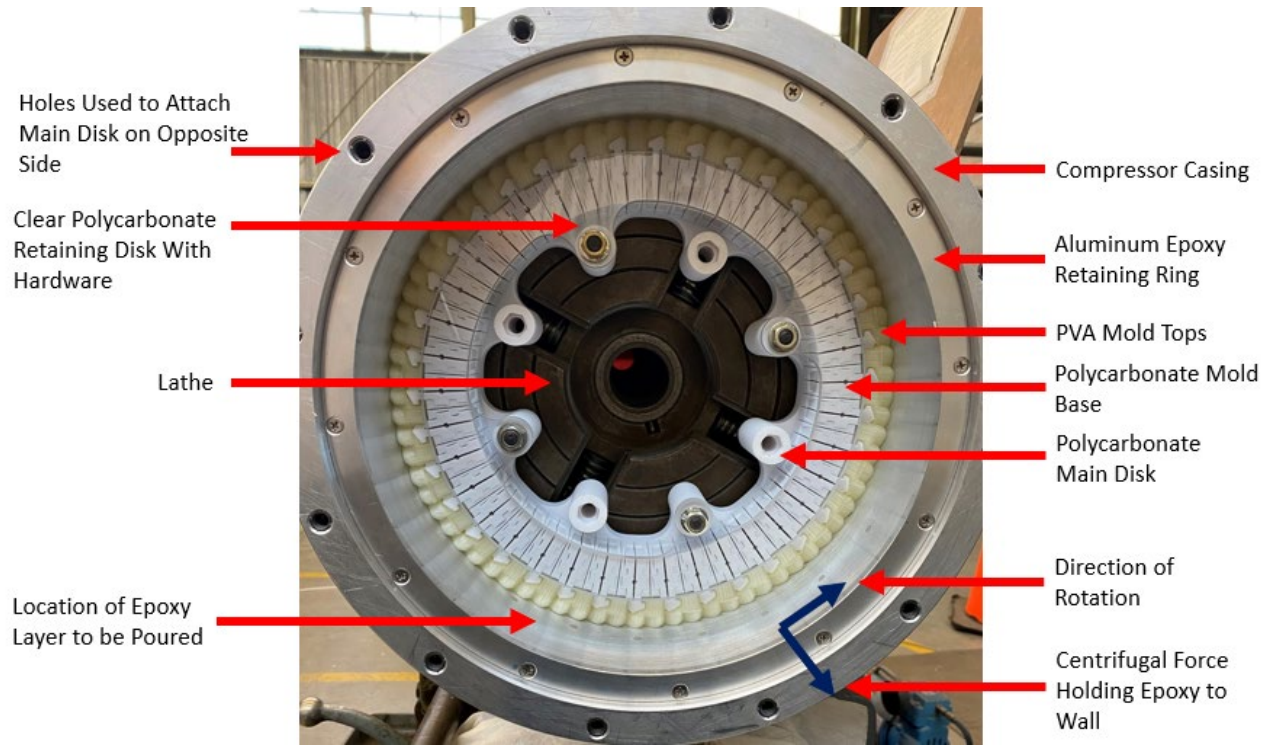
Surface Casing Treatment Assembly on Lathe Front View
